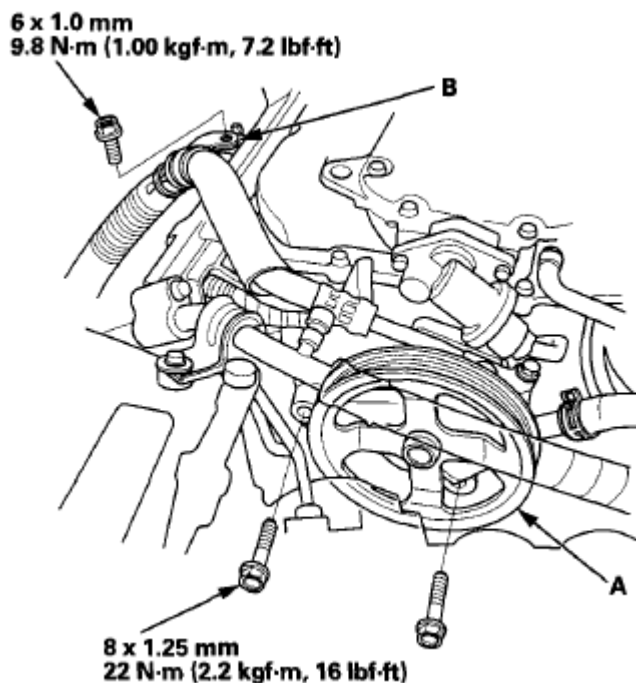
Installing Power Steering Pump And Power Steering Hose Bracket With Torque Specifications
